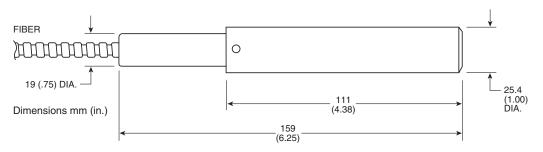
Optical Lens Assembly (L1) .25" @ 8" FOV
